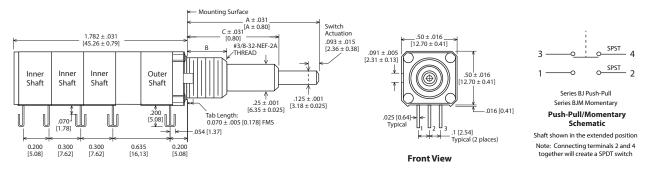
SHA13: Concentric Shafts, Solder Hook, 3 Potentiometer(s) or RS + PP, 3/8" Bushing
